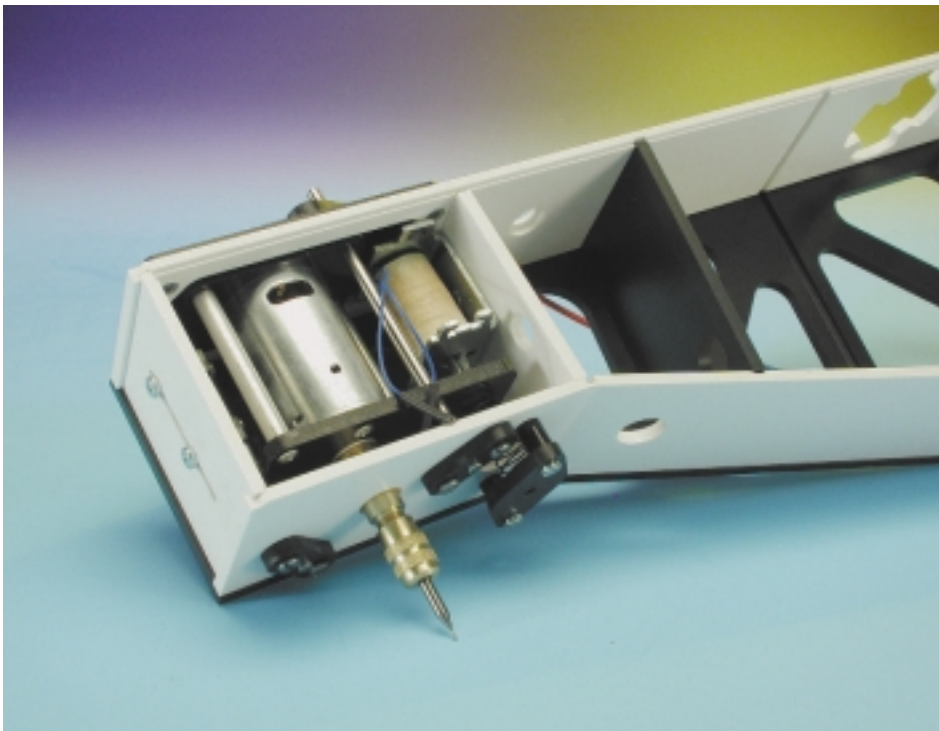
Partially-glued tool arm with drill motor and solenoid already fitted.
